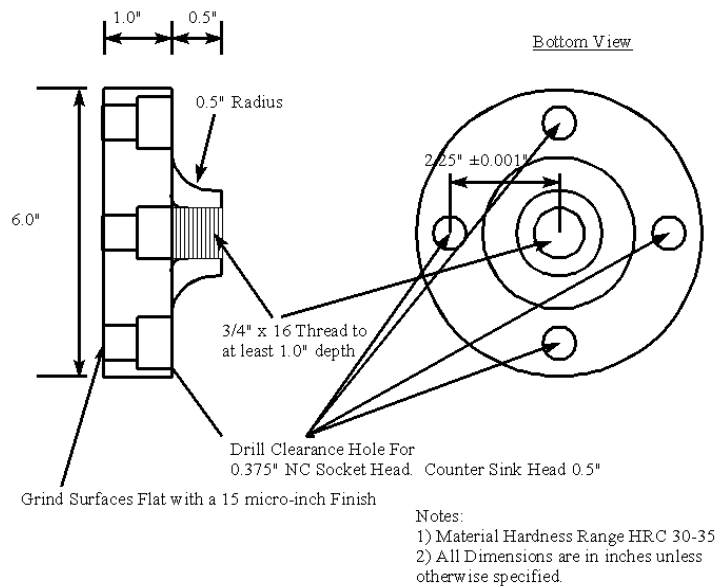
Schematic showing the general dimensional design requirements of the bottom platen of the shear punch test fixture.
